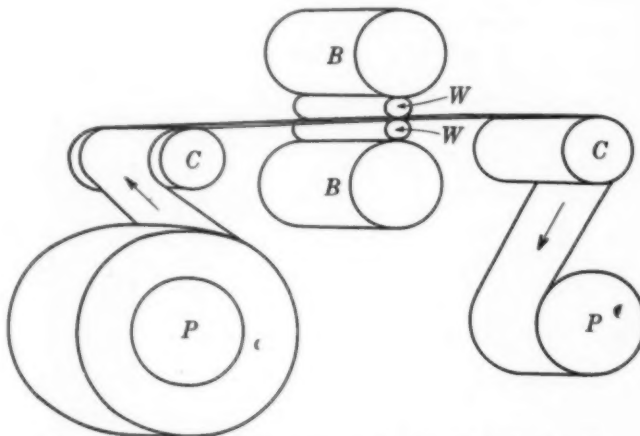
Arrangement of components in a Steckel mill (after The Cold Metal Process Co.
